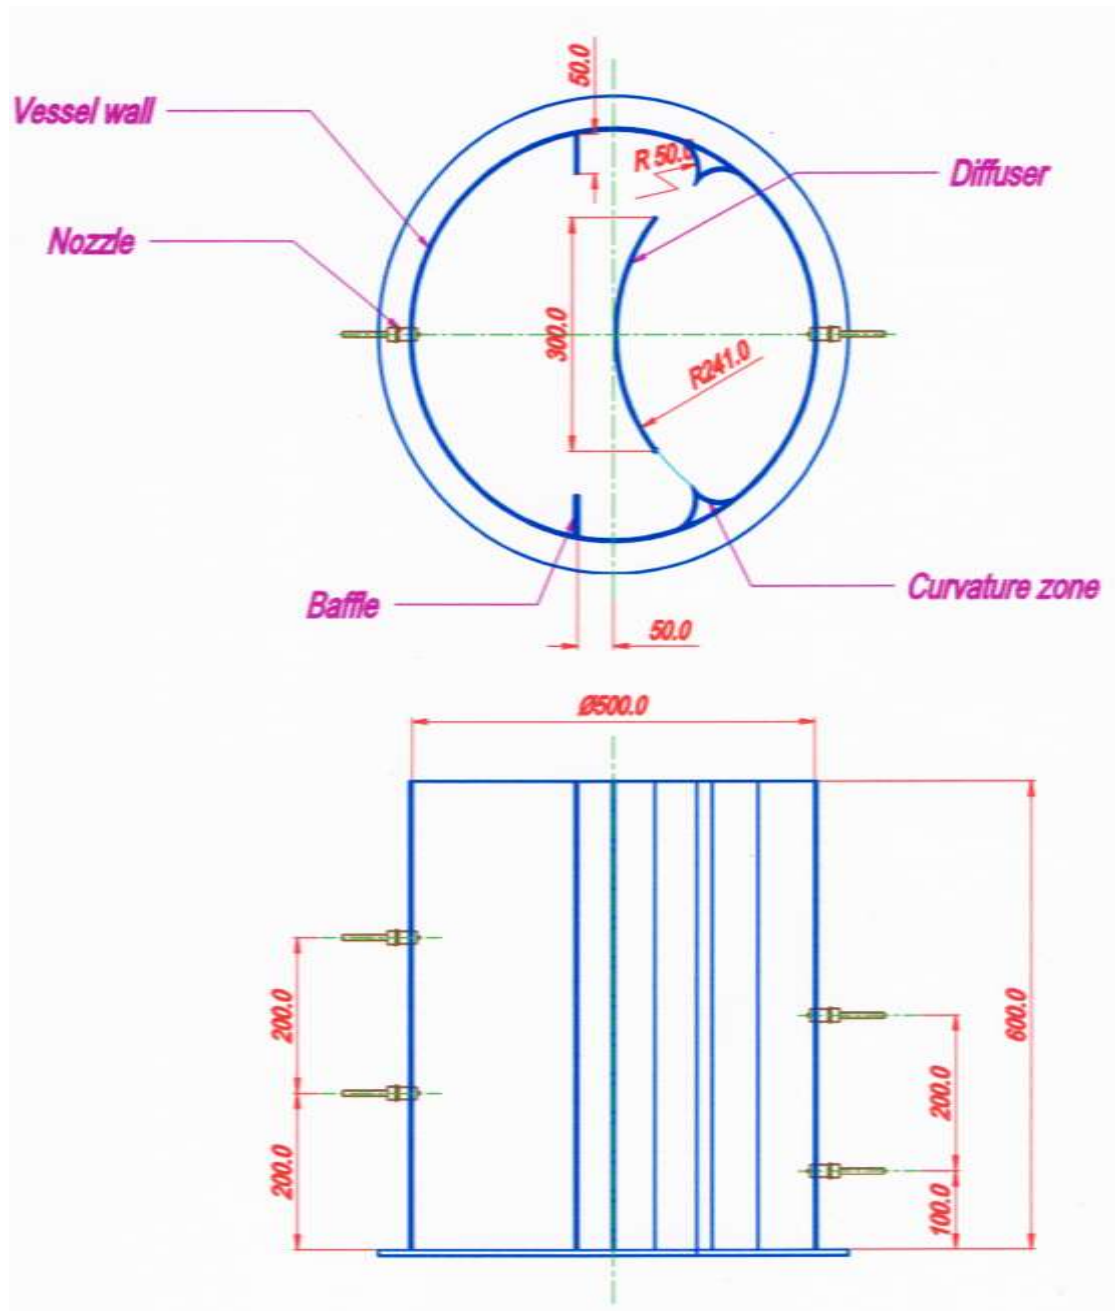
Jet-Mixing tank and Nozzles Layout Arrangement
